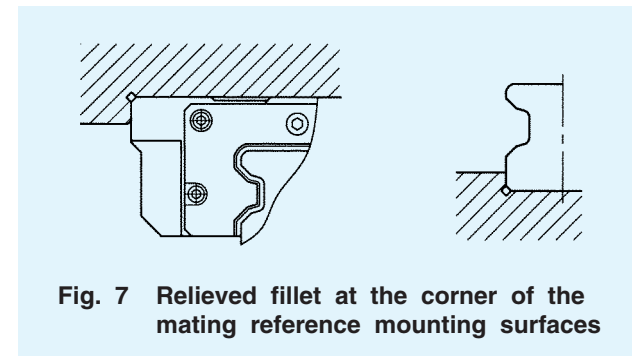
Relieved fillet at the corner of the mating reference mounting surfaces
